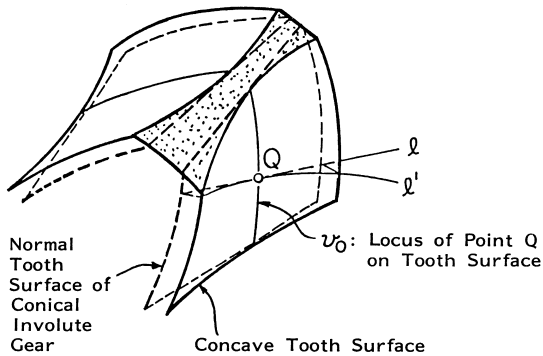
Tooth surface of Concave conical gear compared with tooth surface of conical gear
